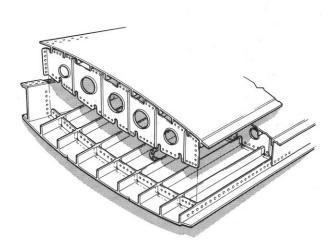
CFC multi-rib wing construction with stiffened skin panels
